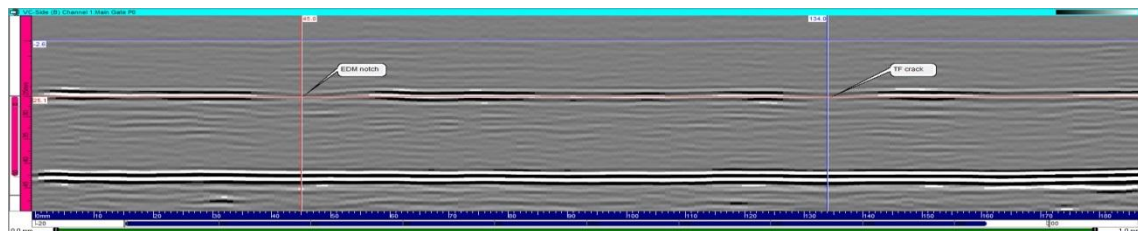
TOFD examination of EDM notch and thermal fatigue crack.
